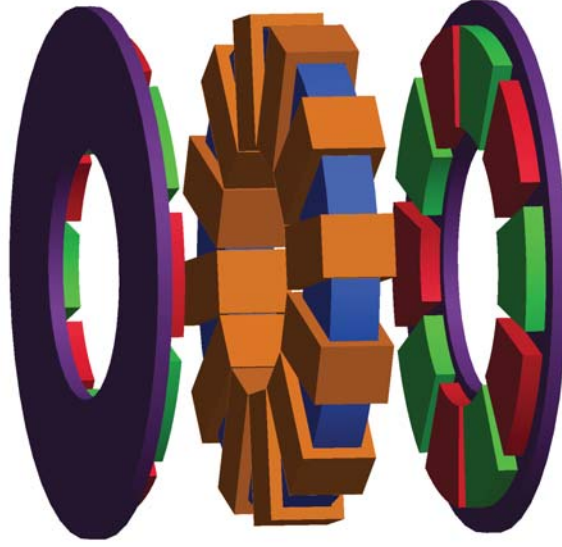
Double-sided AFPM machine with internal ring-shaped stator core.
